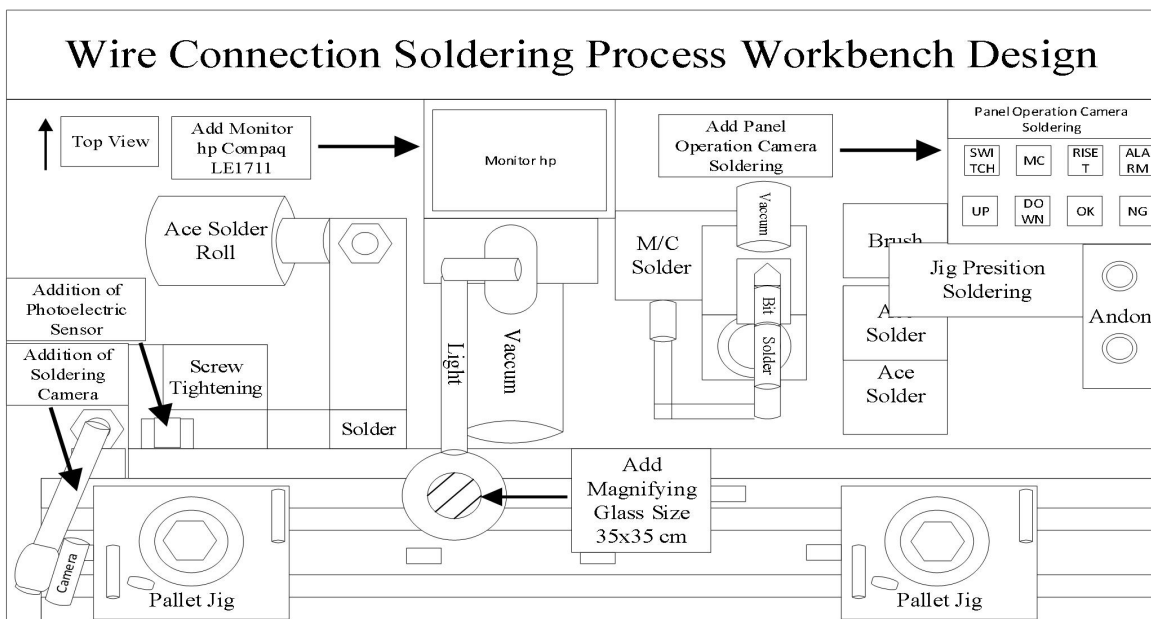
Workbench Design After Adding Poka Yoke Camera Soldering
